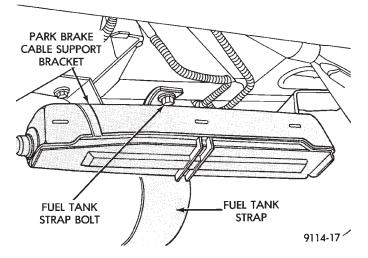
Brake Cable Support Bracket—All Wheel Drive
